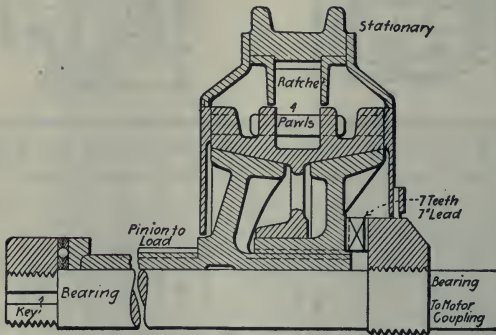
Cone Brake "Naval" Boat Crane Full Load Torque = 7880 In-Lbs.
